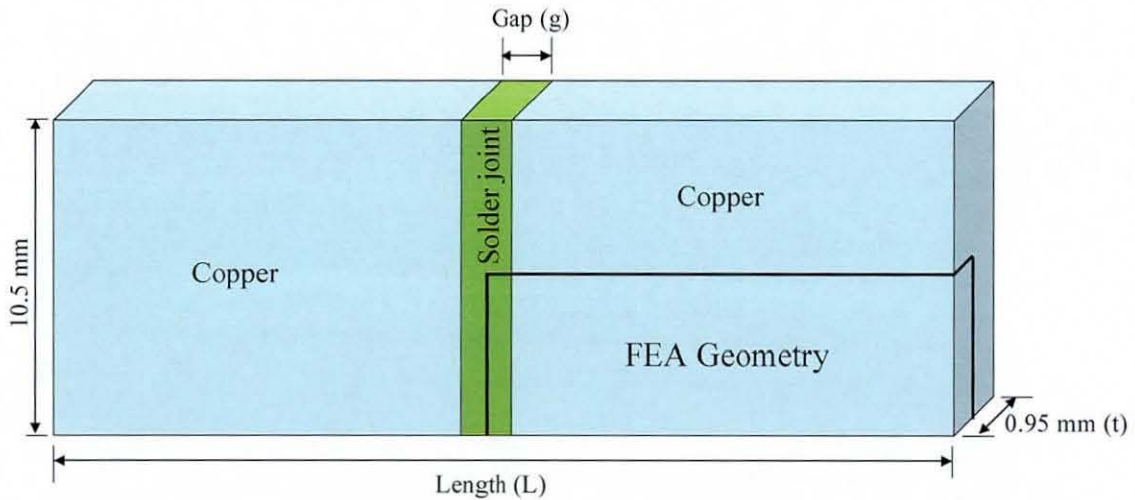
Geometry of solder joint specimen and its octant used in full model analysis
